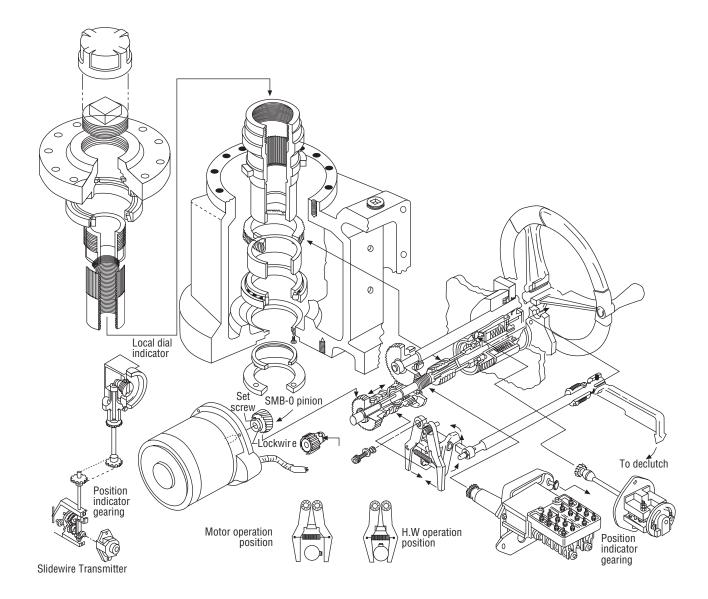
SMB-0 through SMB-4 and 4T Exploded View
